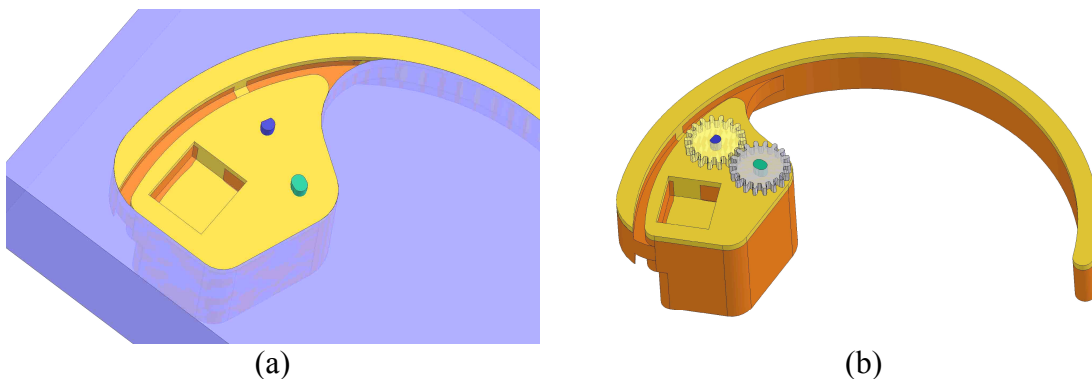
Hip clamp pocket and slider slot pocket (a), wax removed and gears added (b).
